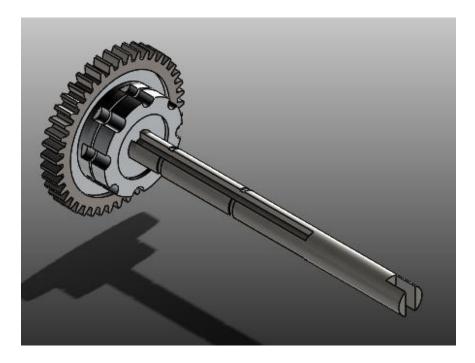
, Output Shaft and Synchronizing Hub Sub-assembly
